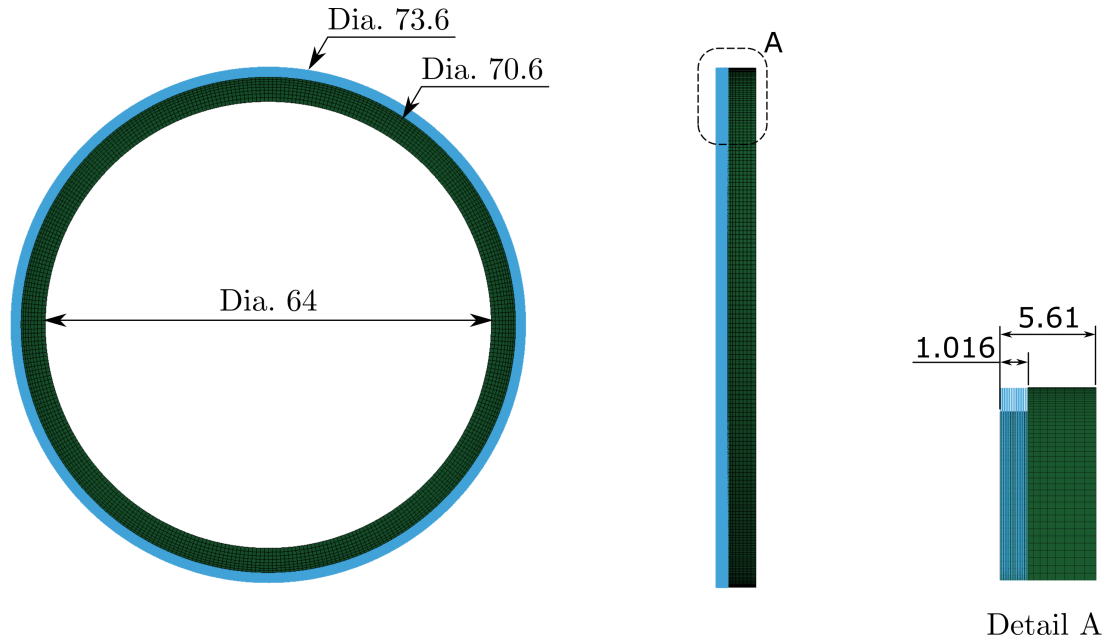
Geometry of the workpiece used in 3D machining model.
